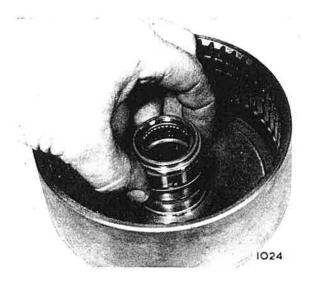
Fitting the "O" ring on the rear clutch hub.
